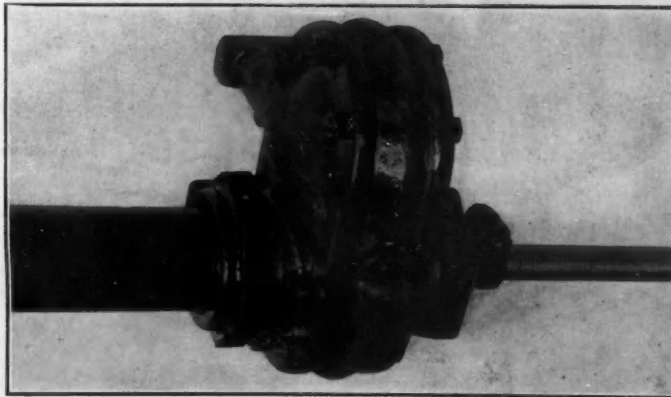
GEAR OIL-PUMP ON STEERING-COLUMN
